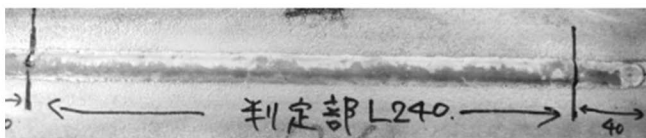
Appearance of weld bead (laser-arc hybrid welding)
